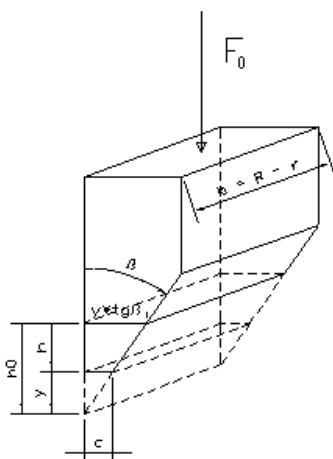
Crown tooth with technical elements with geometrical laws taken in account
